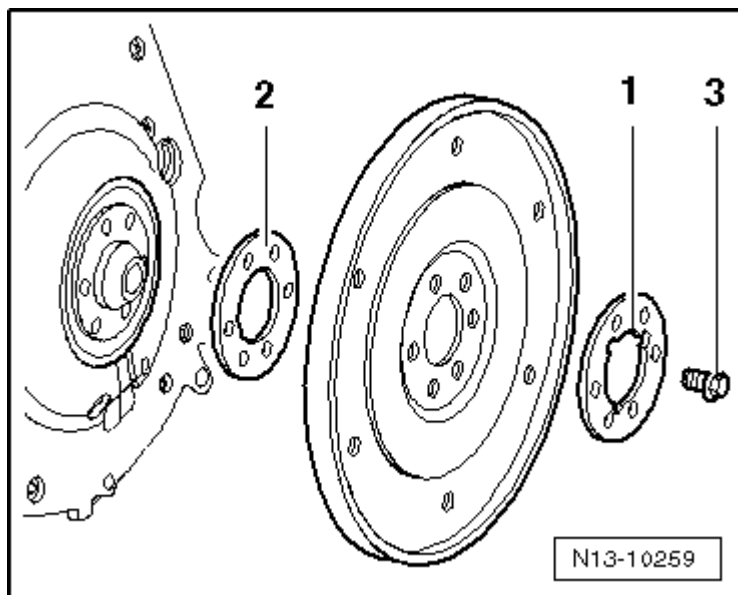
Installing Drive Plate Only By Using Washer With Recesses
